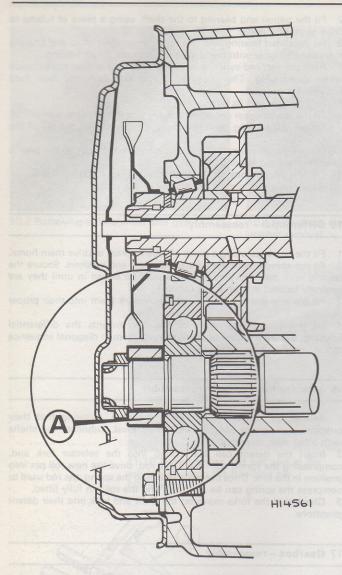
Shaft spacer (A) on four-speed gearbox (Sec 14)
